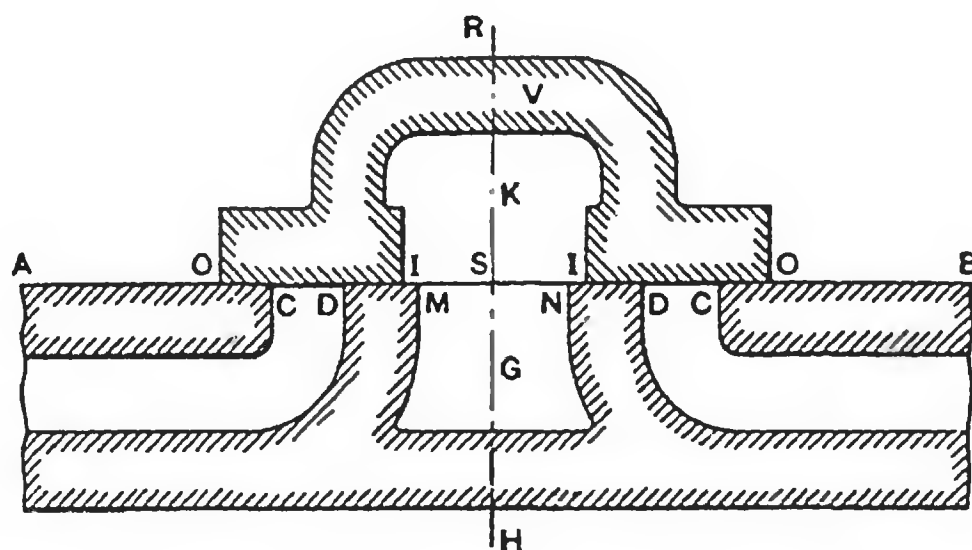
Longitudinal Section of a Steam Engine Slide Valve and Ports
